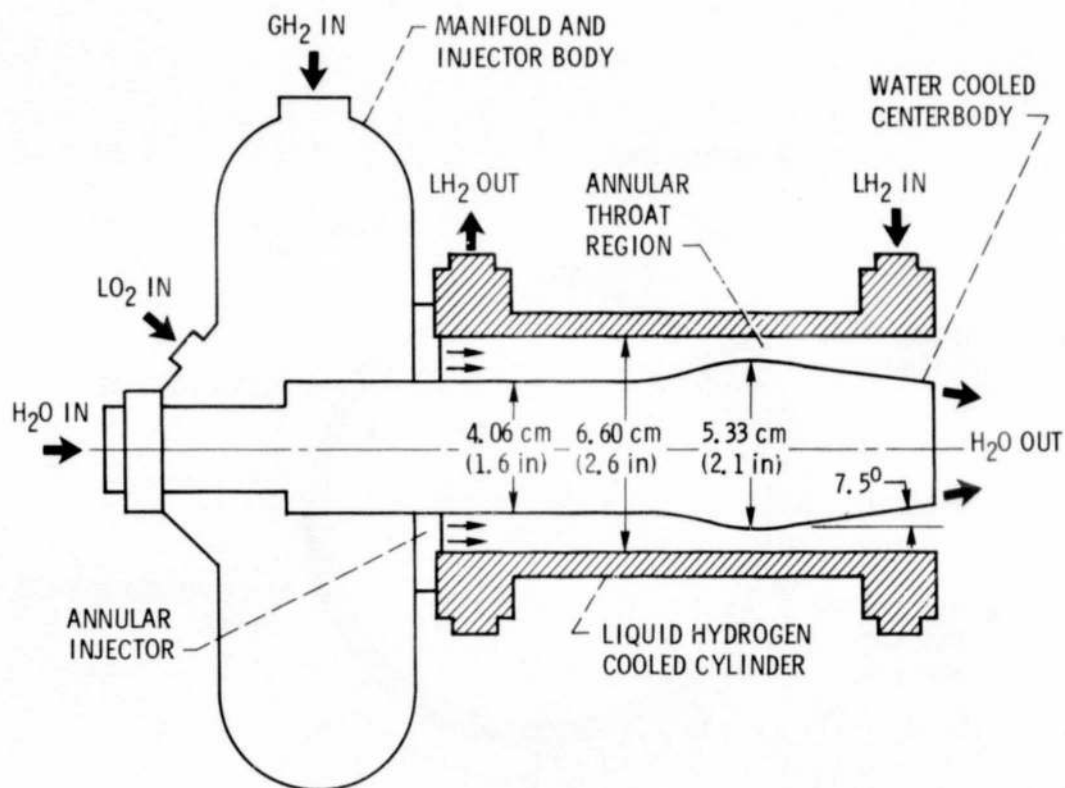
Schematic of cylindrical thrust chamber assembly.
